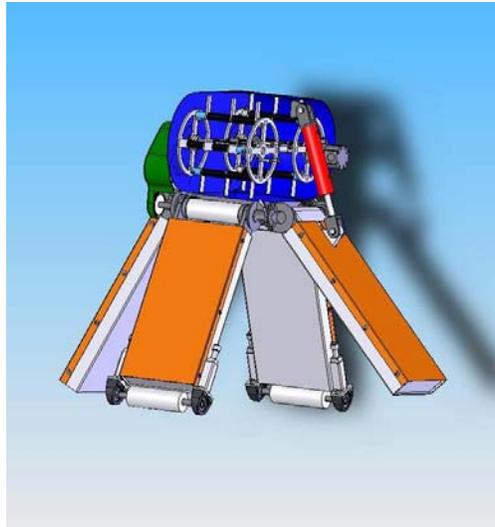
below is a picture of the Hedge Trimmer Cutting Fixture. It shares some of its components with the Rotary Impact Cutting Fixture described in detail in Chapter 2.
